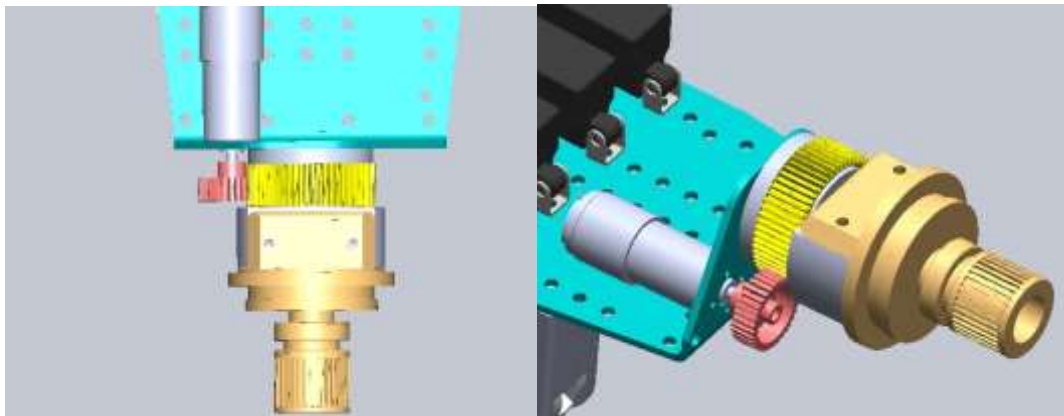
(a) Wrist layout (b) Wrist layout close-up
